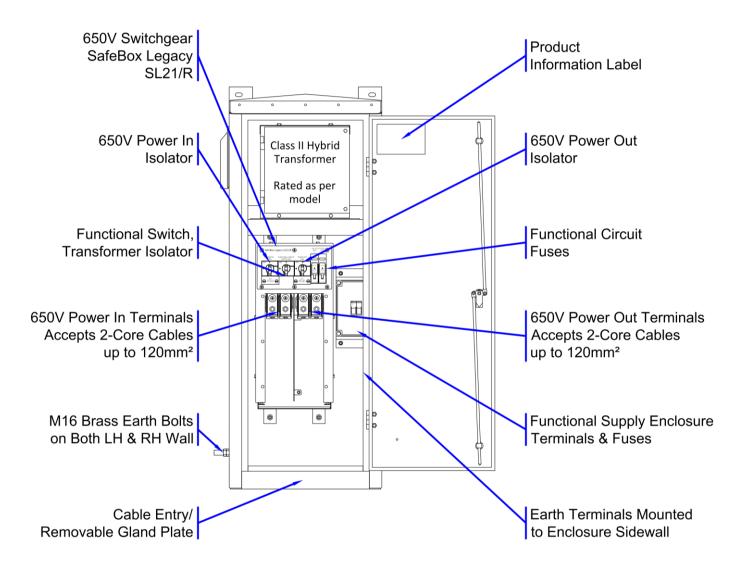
Legacy Connect (SL21/R) Internal Arrangement
